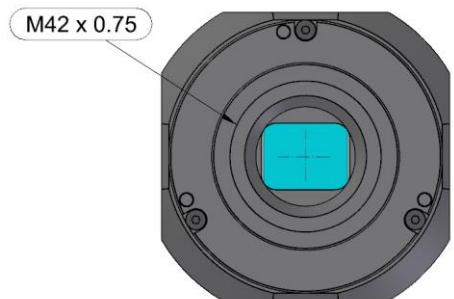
C1+ camera head with C1 compatible adapter front view dimensions
